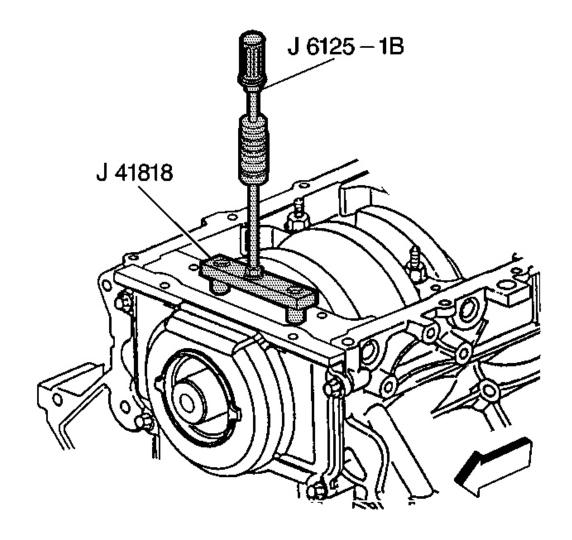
View Of J 6125-1B & J 41818 Removing Main Bearing Cap Courtesy of GENERAL MOTORS CORP.
